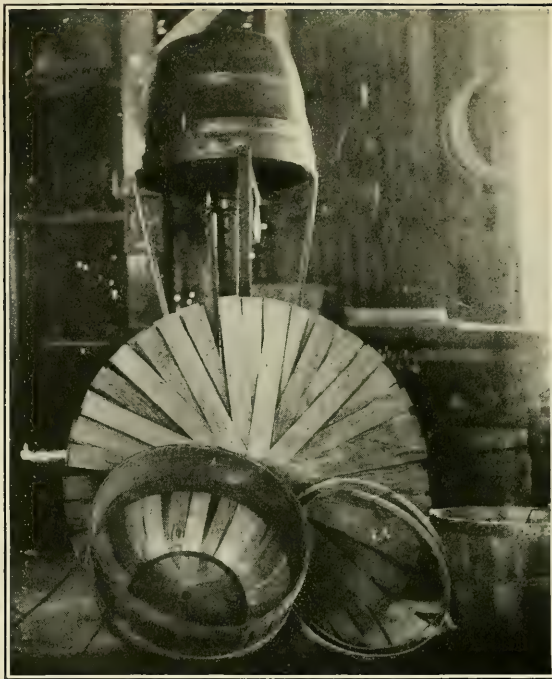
SHOWING MACHINE FOR MAKING BUSHEL BASKETS, SPLINTS IN CIRCULAR FORM READY FOR BENDING ON MACHINE, HOOP AND FINISHED BASKETS. GRAIN BASKET IN FRONT.
